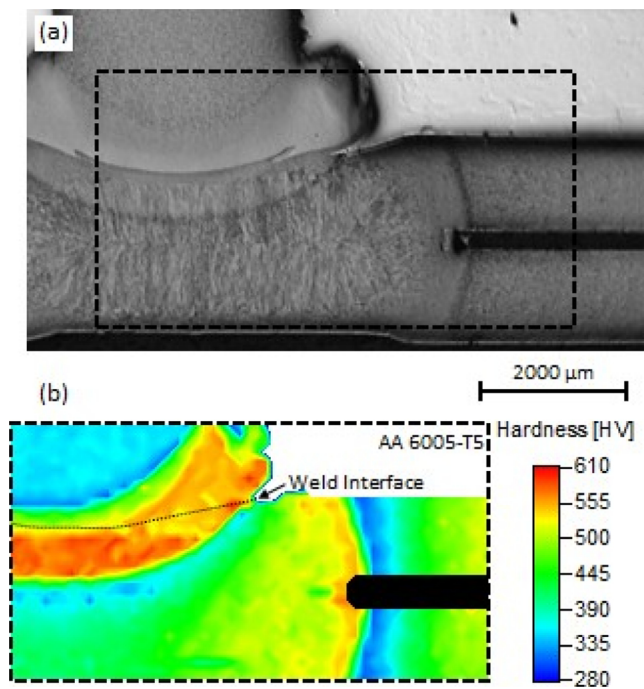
Macrograph of the multi-process resistance spot weld/friction element weld joint with dashed box to represent the indented region; (b) microhardness mapping of the resistance spot weld/friction element weld joint.
